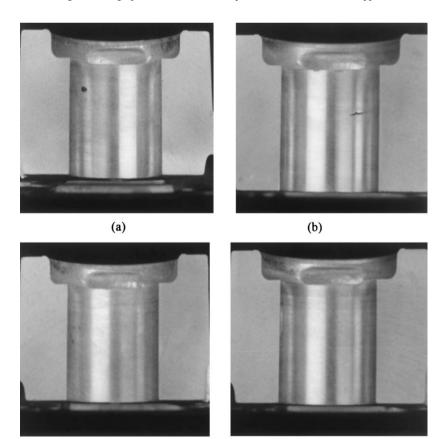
Photographs showing sectional views of the reaction shaft support: (a) CD; (b) SD; (c) VD; and (d) SVD.
